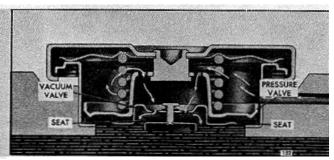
Pressure Control Cap (Vacuum Valve Open)
